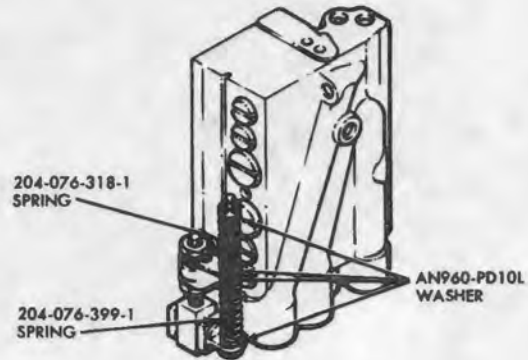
Cylinder assembly dimensions (UH-1B serial no. 64-14101 and subsequent)
